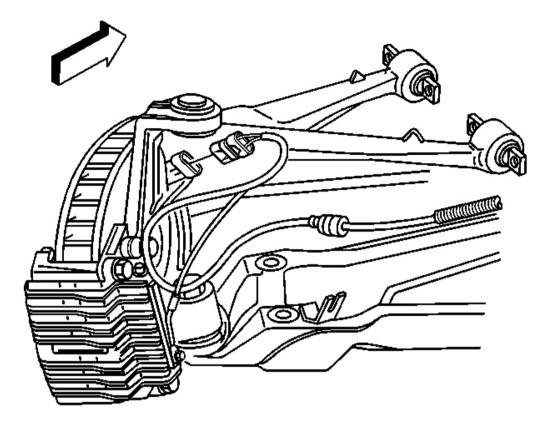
Upper Control Arm, Lower Control Arm Ball Joint Stud & Suspension Knuckle Courtesy of GENERAL MOTORS CORP.
